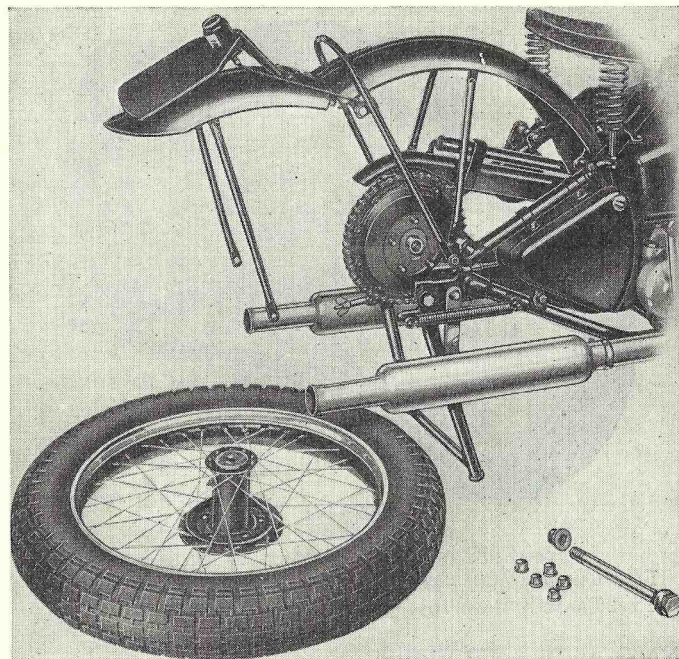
1950 DETACHABLE REAR WHEEL SHOWN WITH RIGID FRAME AND 1939-49-50 HINGED-TYPE REAR MUDGUARD.
